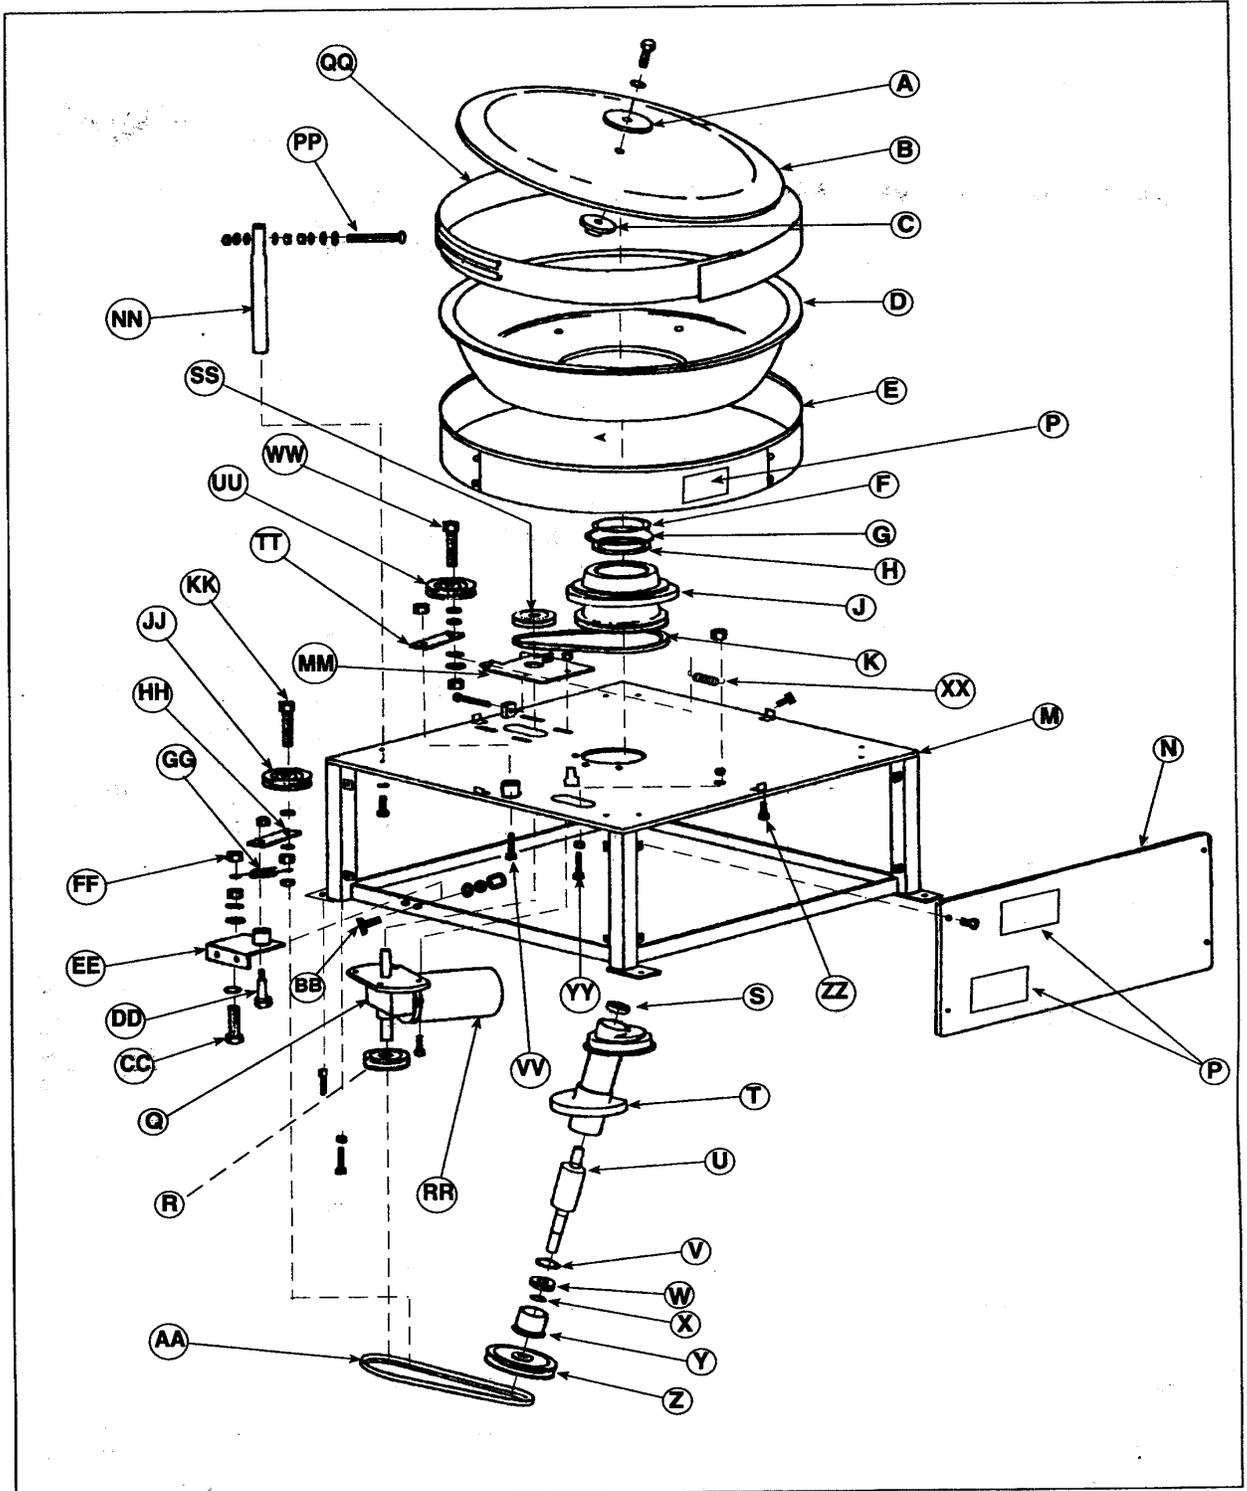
SINGLE DRIVE ROF FEEDER COMPONENTS
